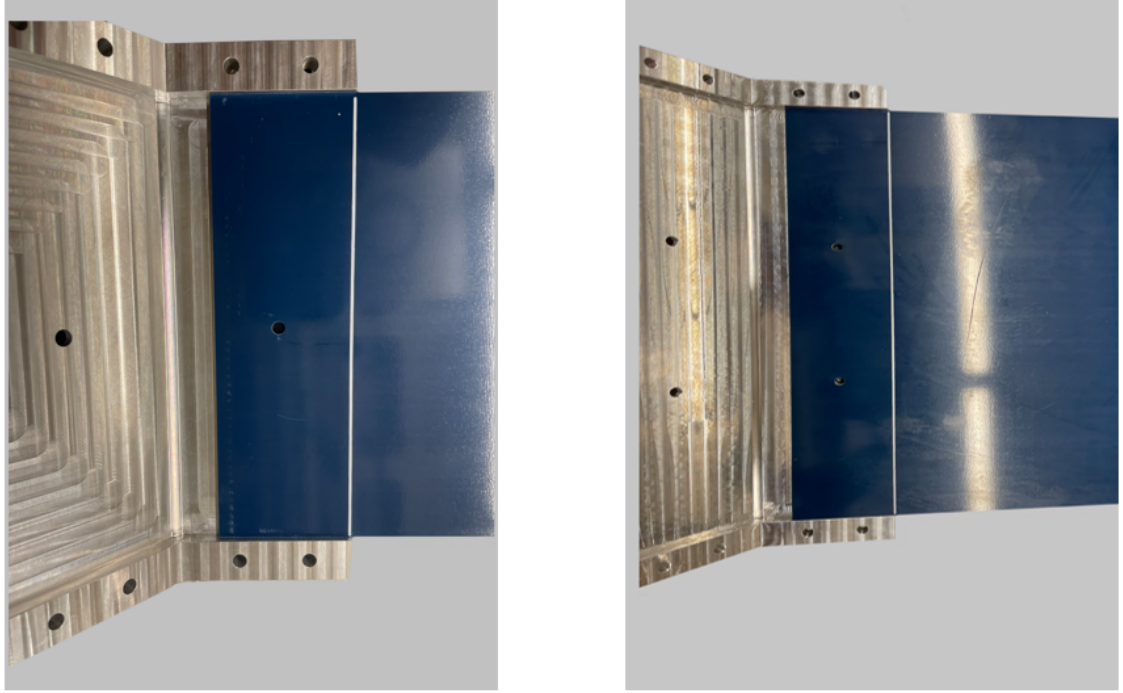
The PCBs have through holes that match the holes in the center of the CNC-machined connector housings. The left image shows a hole in the center of the medium-sized PCB that aligns with the hole in the medium-sized connector. Similarly, the right image shows two holes in the large PCB that align with the corresponding two holes in the larger connector.
